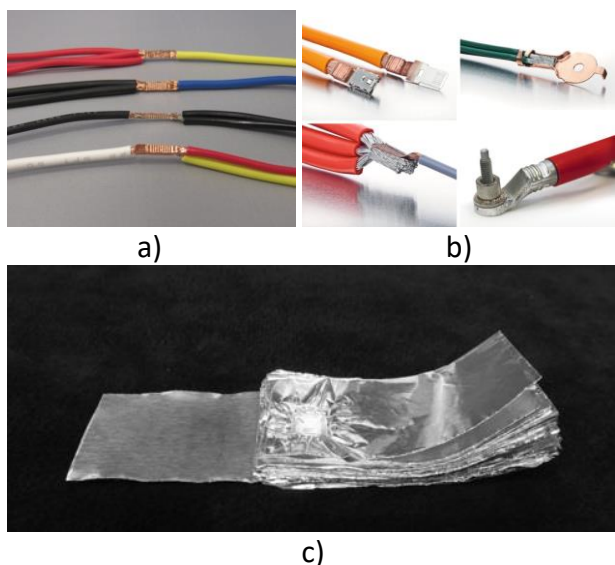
USW applications: a) multi-conductor cables; b) high-voltage conductors; c) 60 aluminium foils, 25 µm thick [5]
